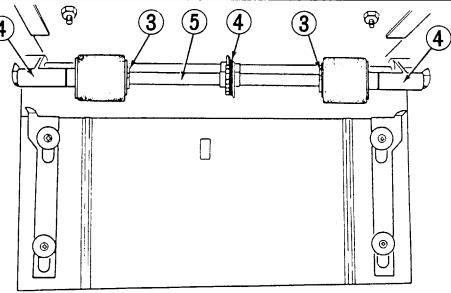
PAPER ROLLER DRIVE SHAFT REMOVAL
